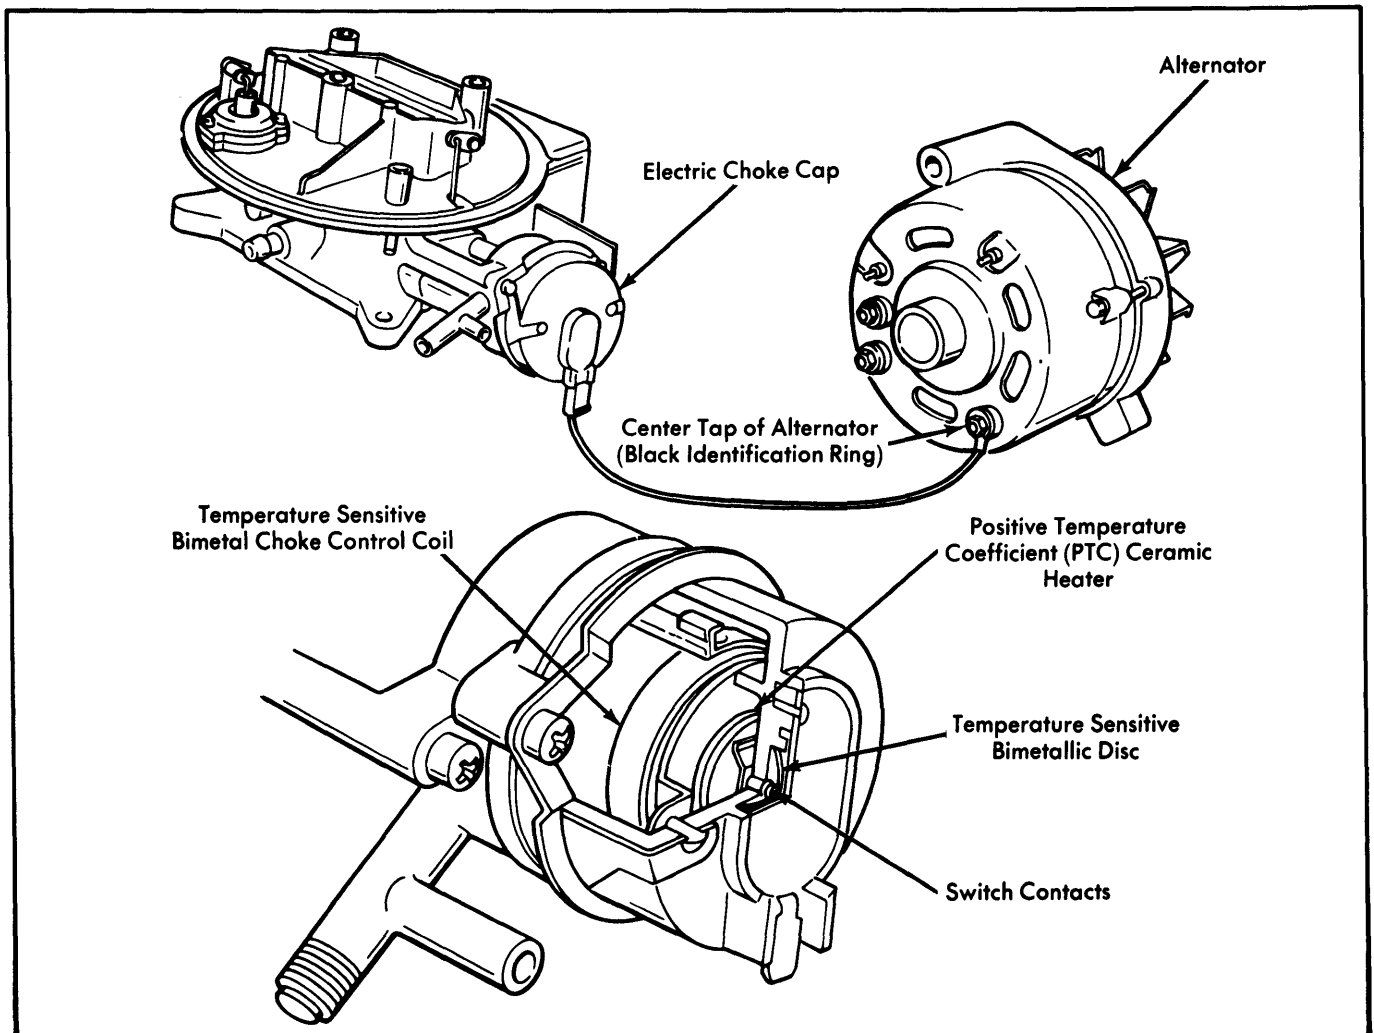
Ford Motor Co. Electric Assist Choke Assembly
